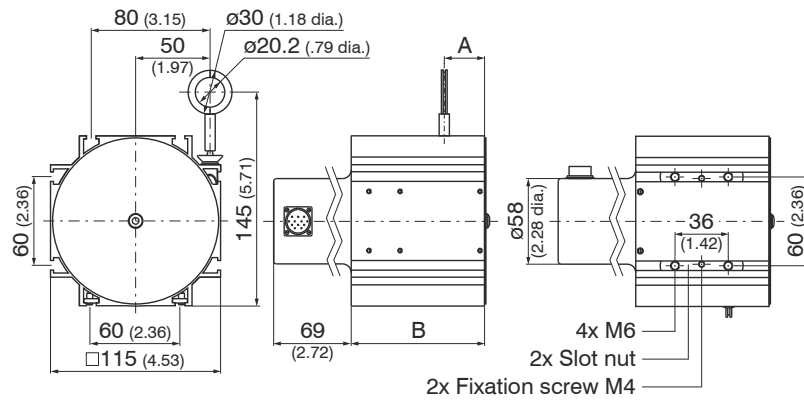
Dimensional drawing ... - FD115 - SSI, dimensions in mm (inches), not to scale
